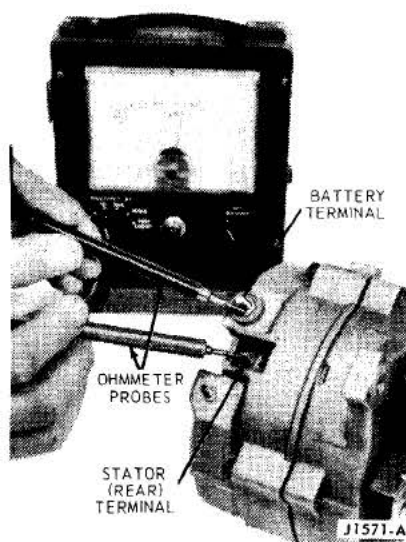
Rectifier Short or Grounded and Stator Grounded Test
